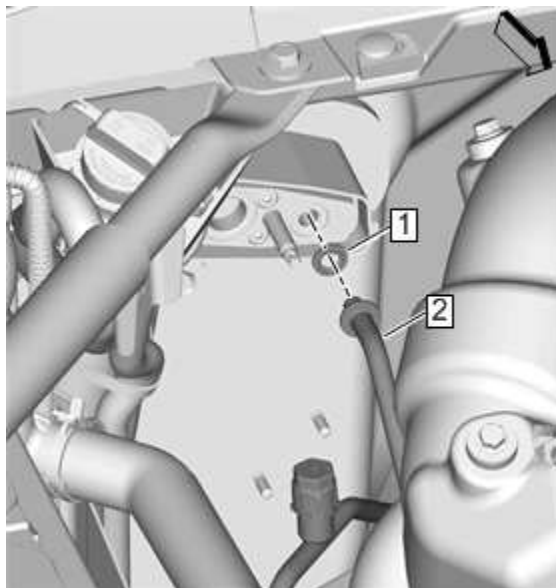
Air Conditioning Evaporator Tube And Air Conditioning Evaporator Thermal Expansion
